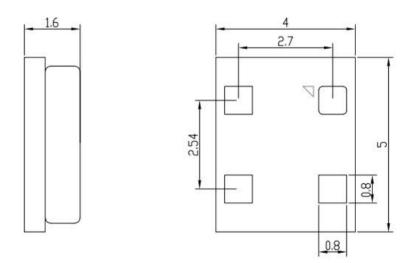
AGS10 dimension (unit: mm, general tolerances: ISO2768-mK)
